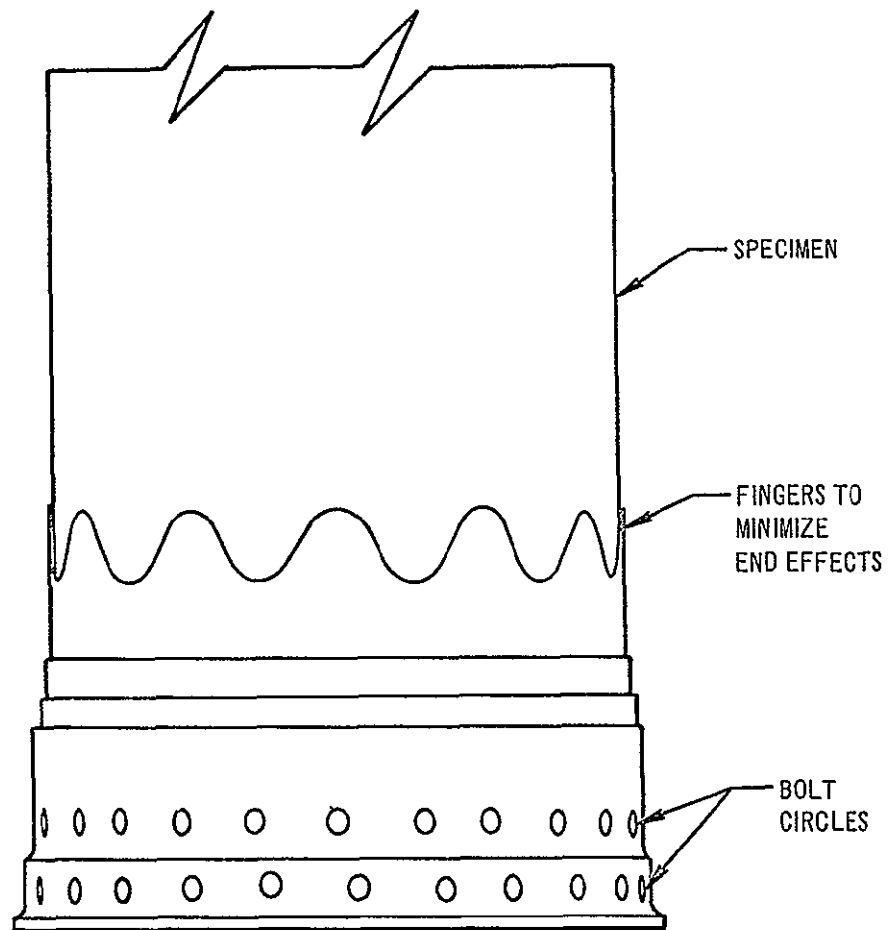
Bonded and Bolted End-Doubler Attached to Each End of Biaxial Test Cylinder
